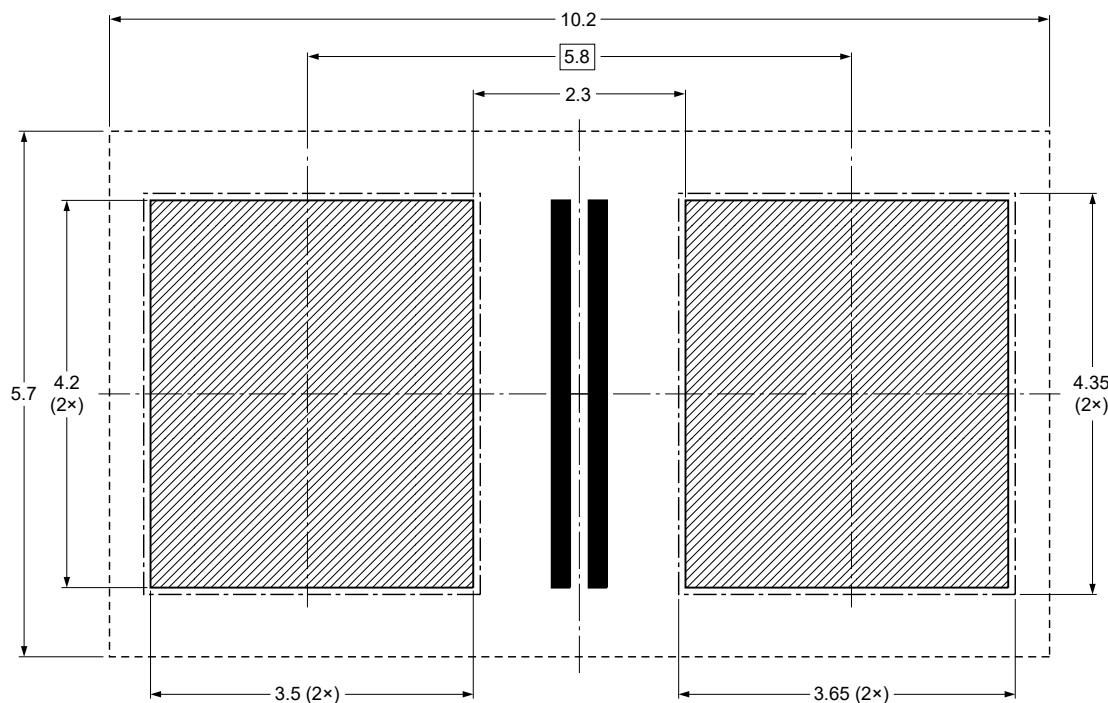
Reflow soldering footprint for CFP5 (SOD128)
